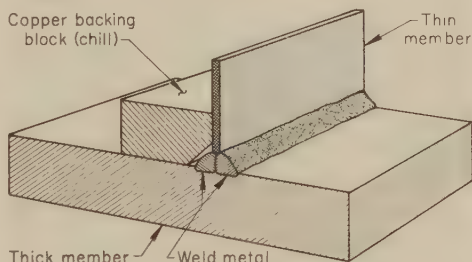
Use of a copper backing block as a chill to minimize heat-sink differential in welding a thin member to a thick member
